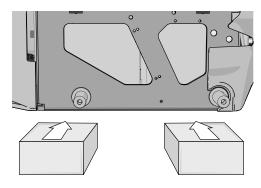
Use two blocks on each side of the chassis box. The wheels has been removed in this figure for better viewing.
